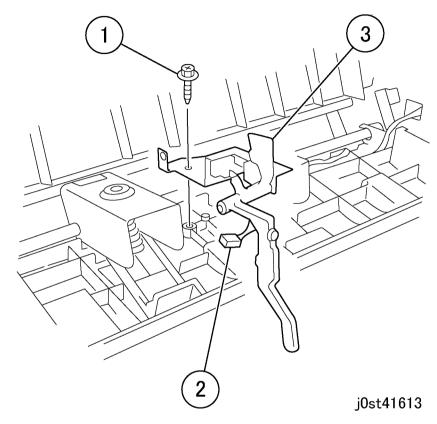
Removing the Stack Height Sensor Assembly (j0st41613)
